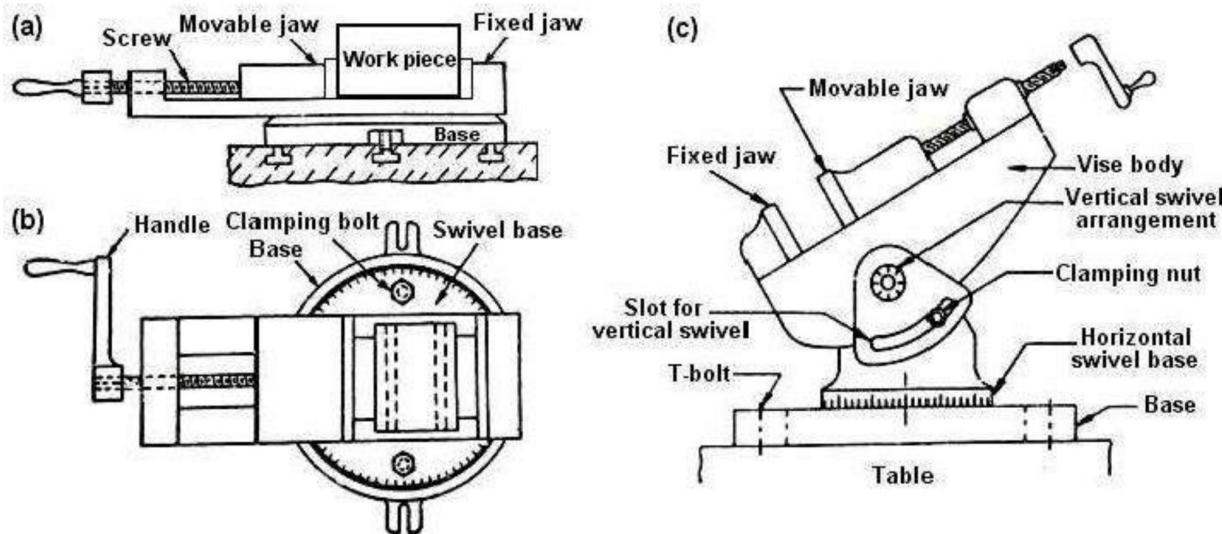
Machine vise (a) Plain vise (b) Swivel vise and (c) Universal vise
